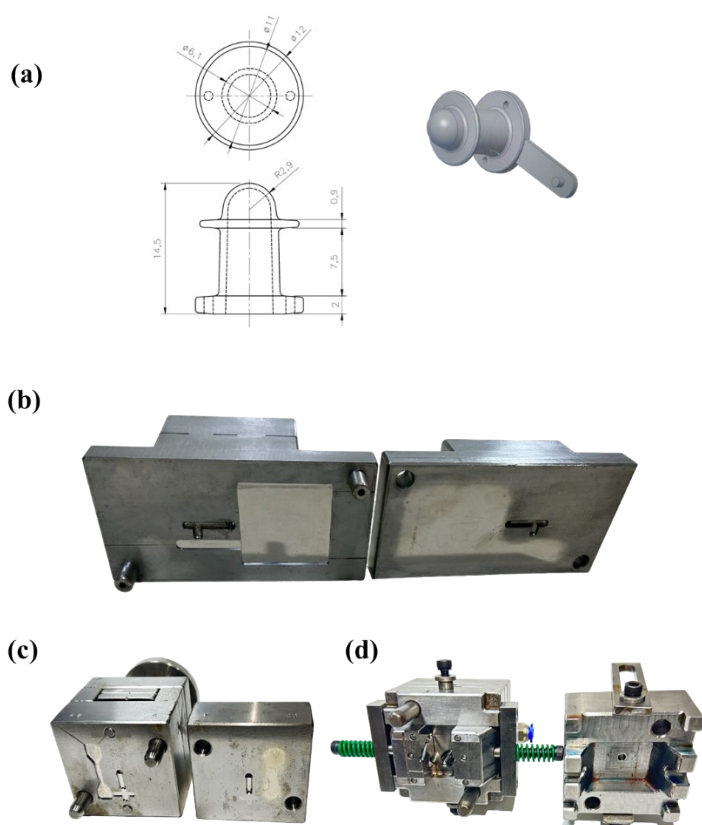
(a) Drawing of the generic design indwelling tracheoesophageal voice prosthesis (TEP), (b) Injection molding tool for test sample sheet, (c) Injection molding tool for dog bone specimen, (d) Injection molding tool for tracheoesophageal voice prosthesis (TEP)
